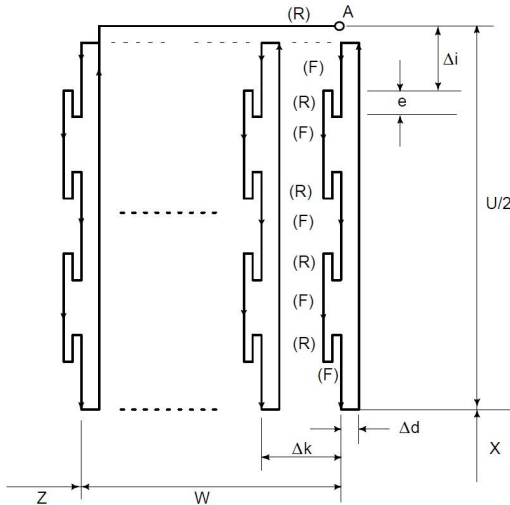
Cutting Path in Outer/Internal Diameter Drilling Cycle
